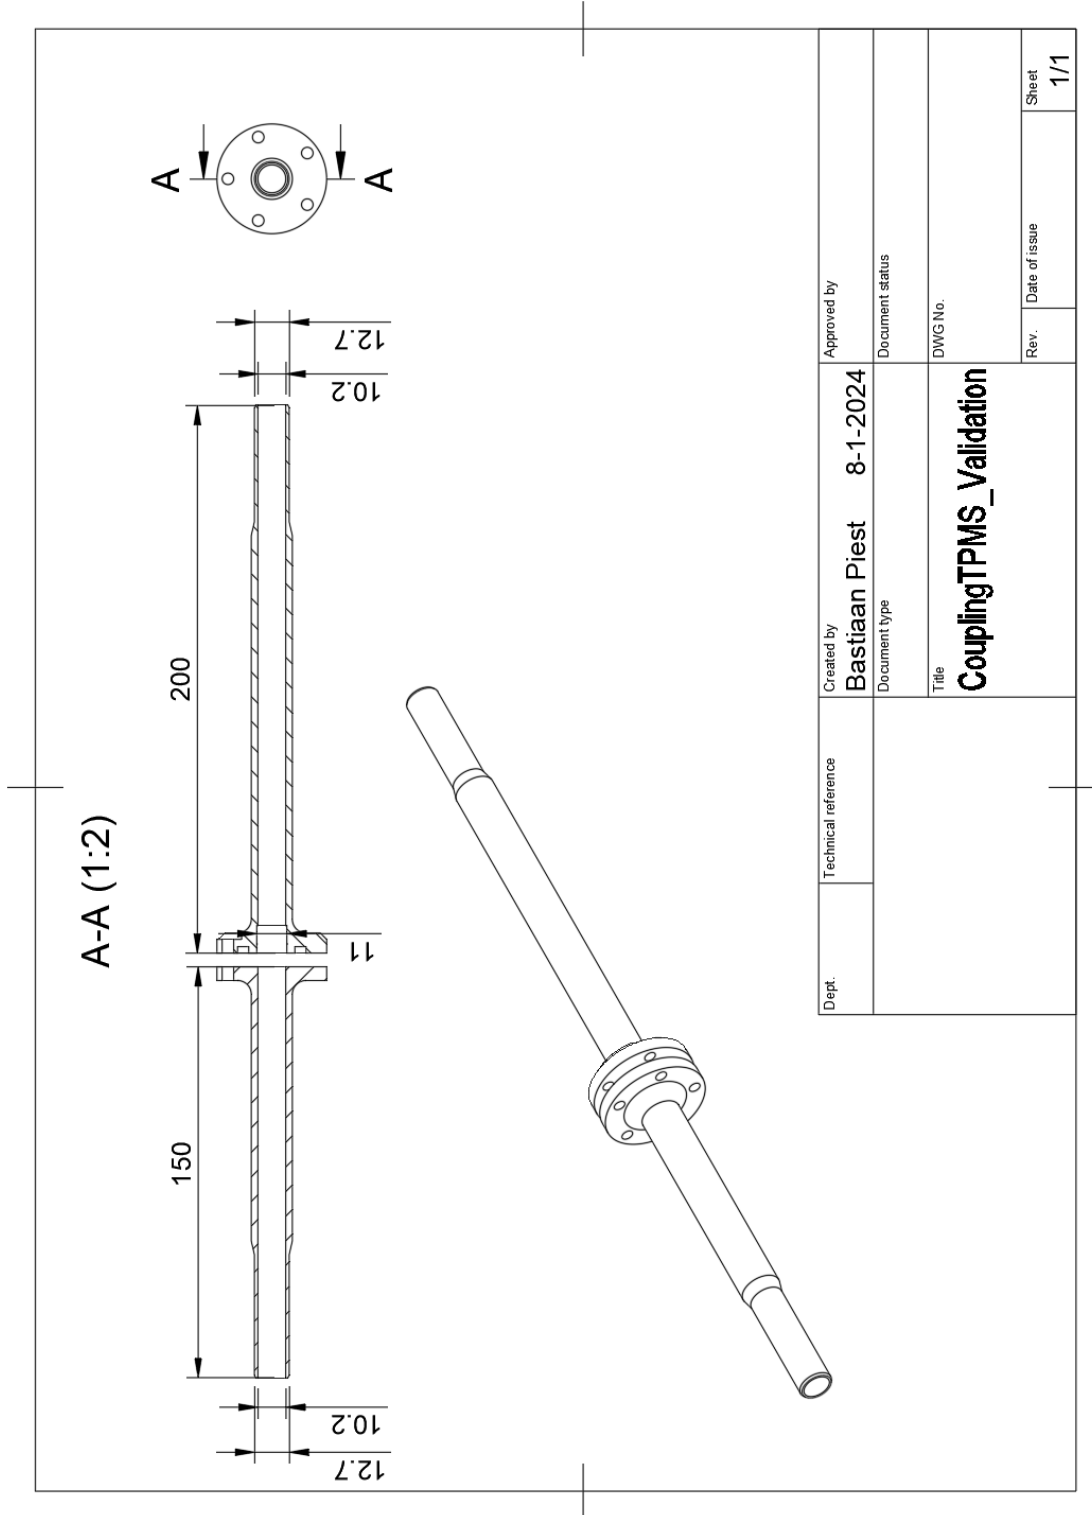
Technical drawing of the straight tube experimental set-up with some important dimensions.
